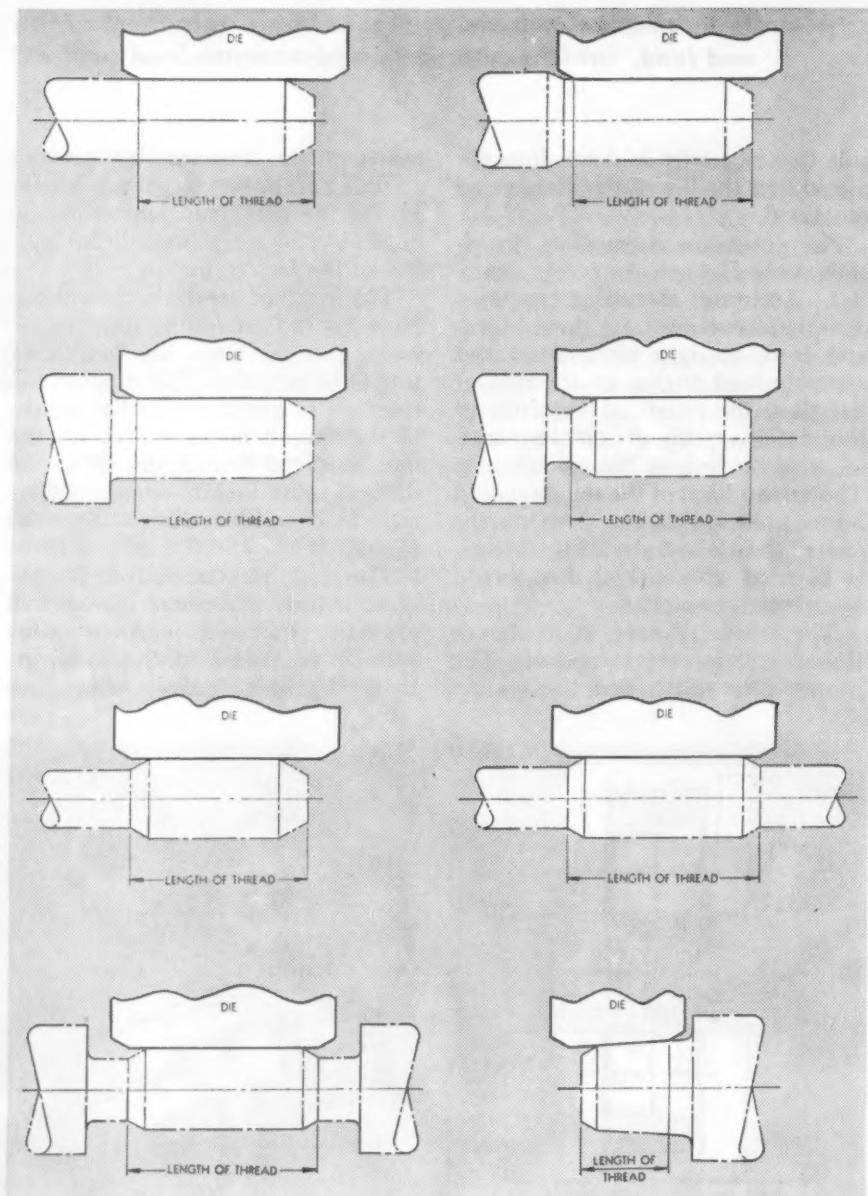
The width of the die or thread roll faces for in-feed rolling must be always greater than the length of thread that is to be rolled, as shown in this drawing.
